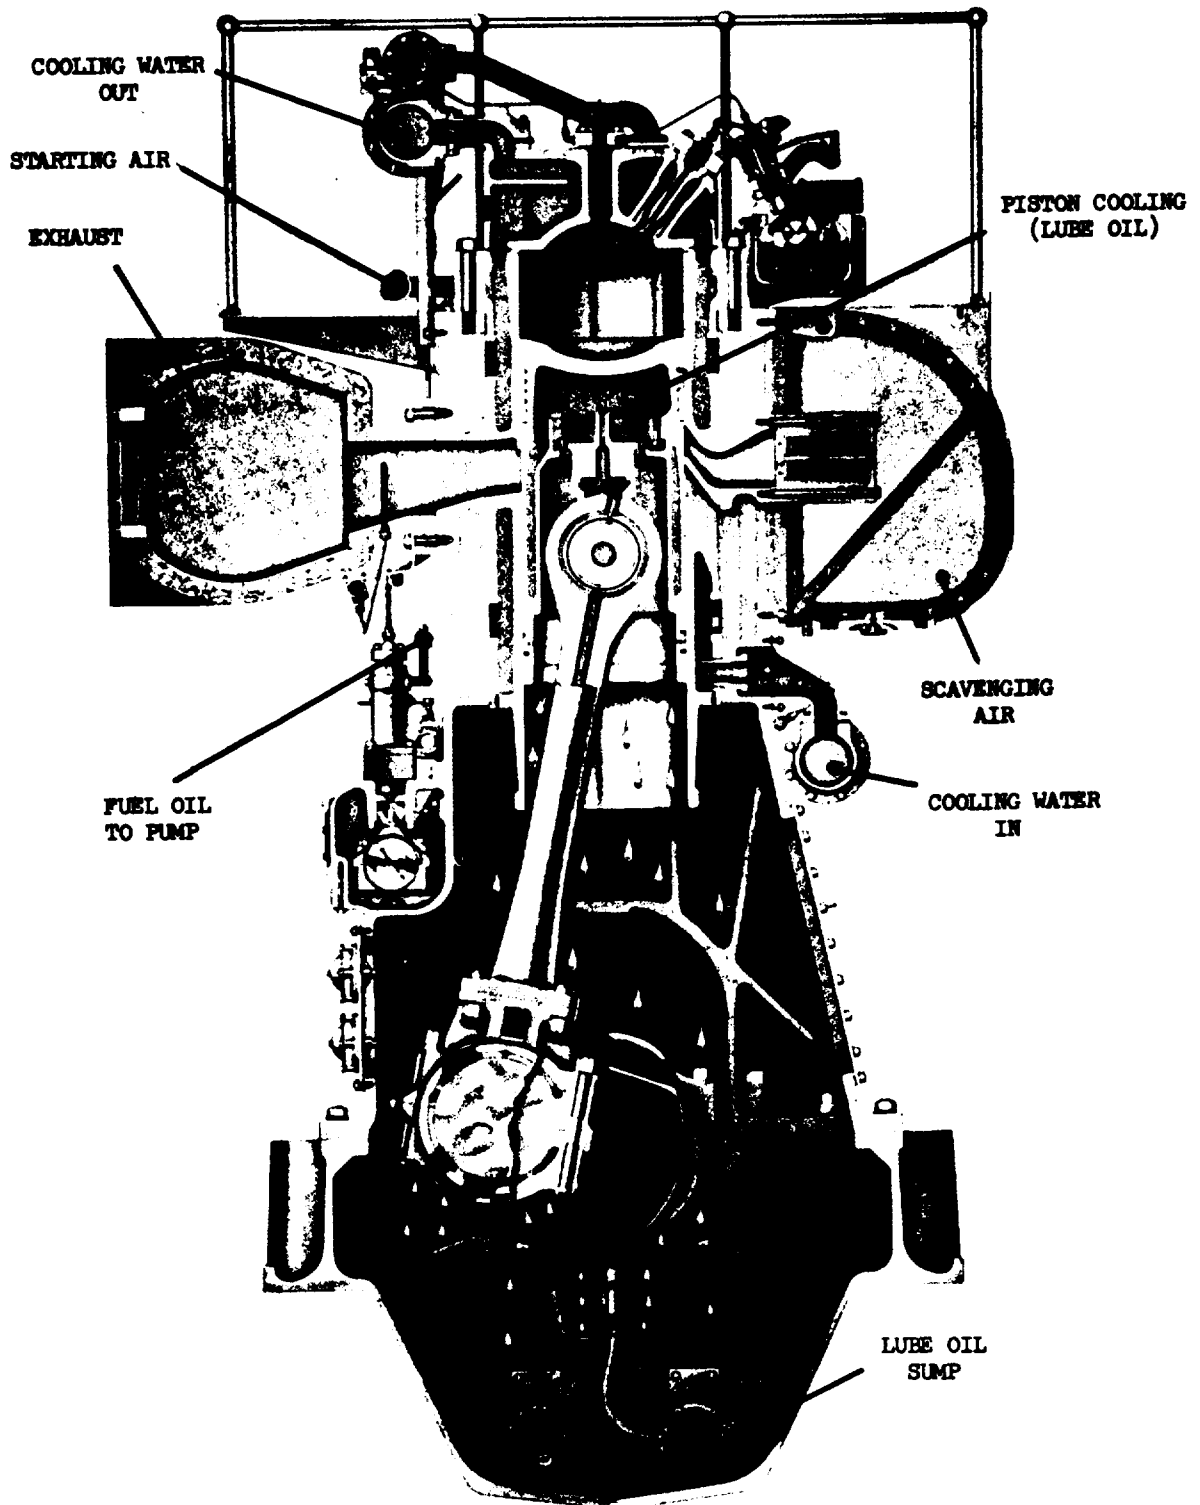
Cross Section of Diesel Engine Showing Lube Oil Flow.
